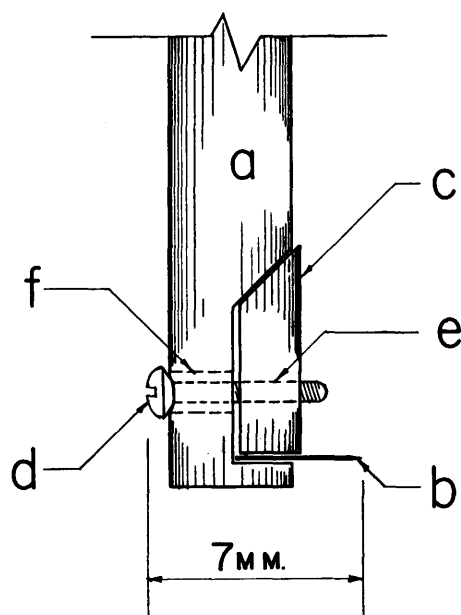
Enlarged diagram of blade assembly, (a) shank; (b) blade; (c) tapered pressure block; (d) screw; (e) tapped hole; (f) oversize hole. As the screw is tightened the pressure block is pulled against the taper and forced down against the blade. The oversize hole in the shank permits the screw to shift with the pressure block.
